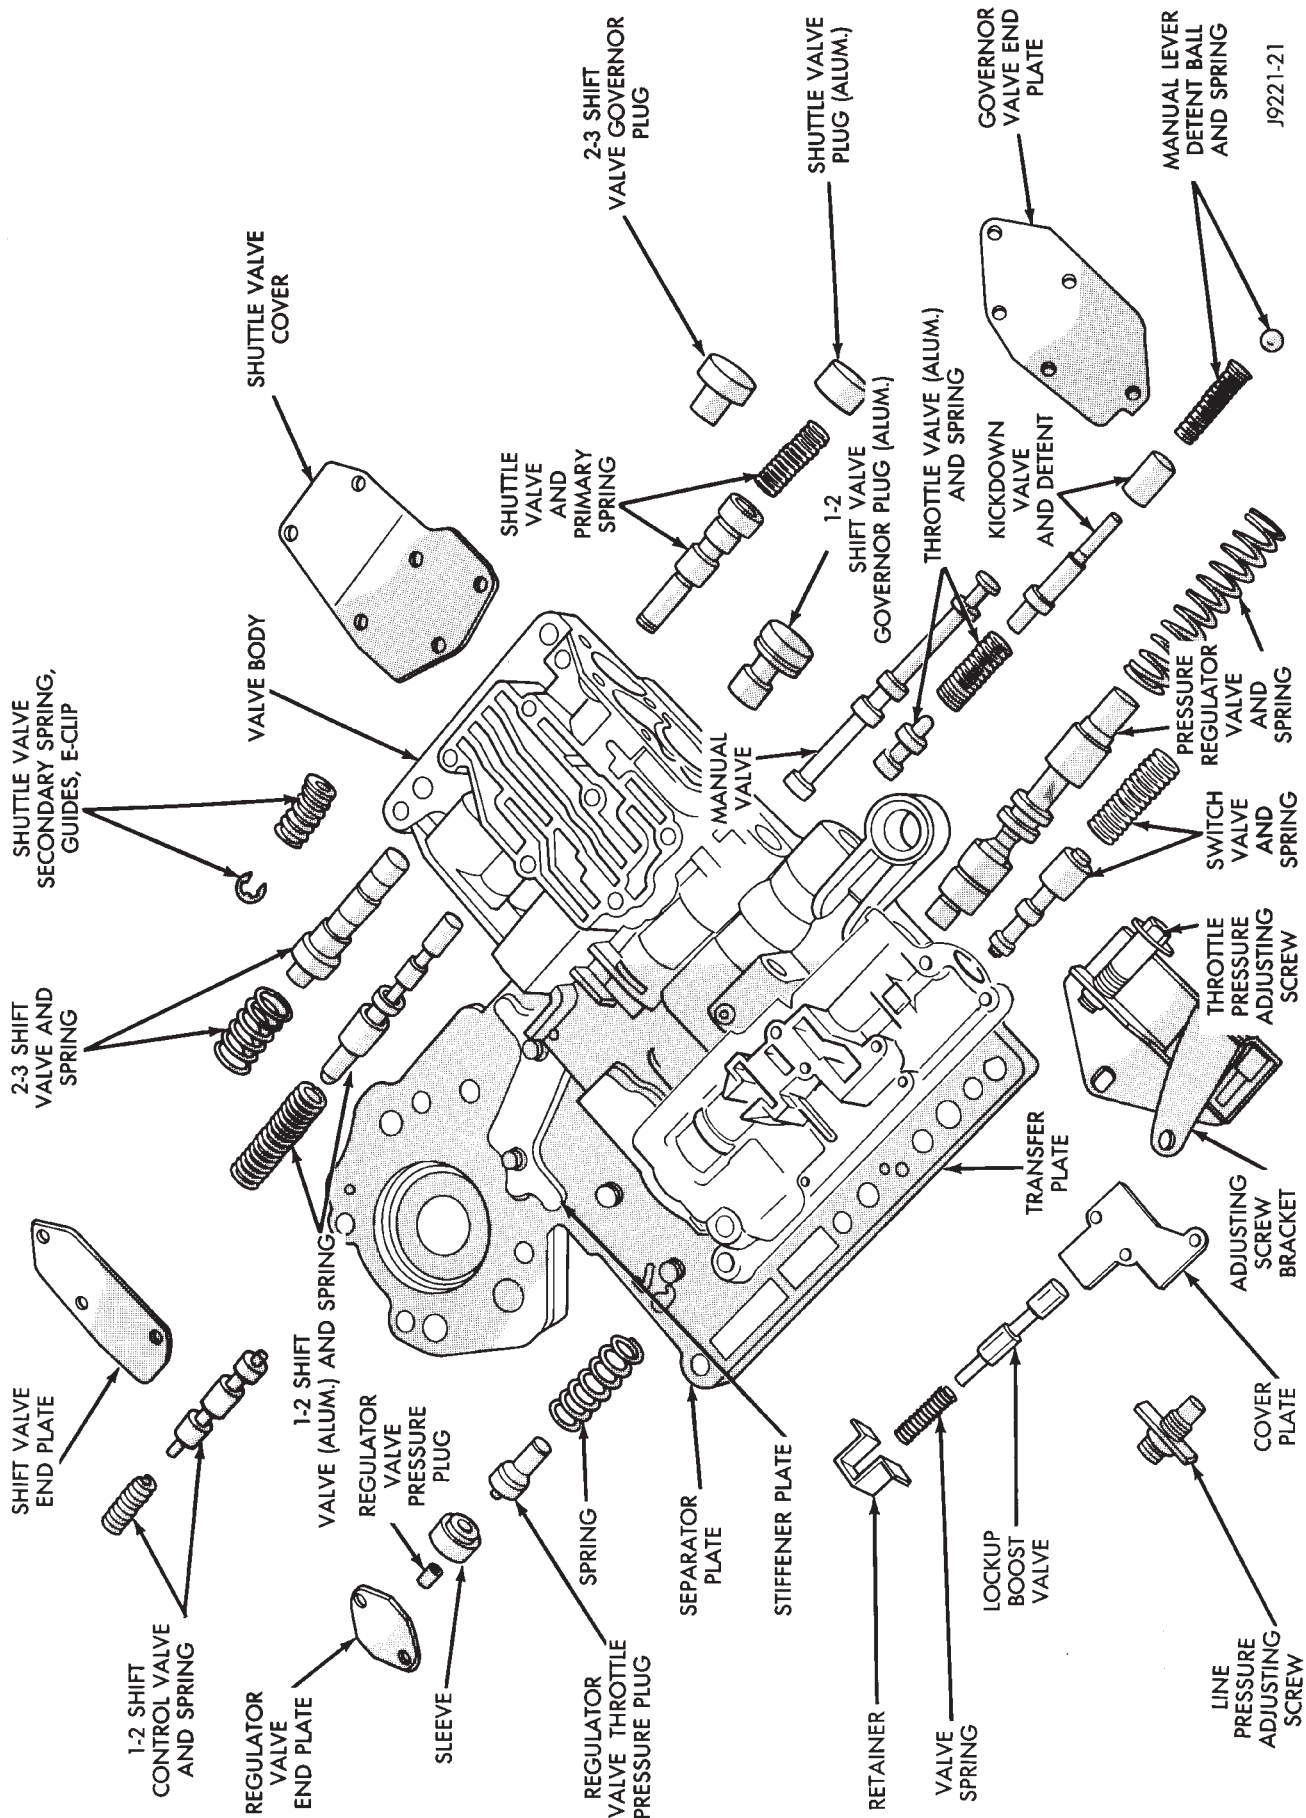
Upper Housing Components (42RH) Valve Body (Alum. Indicates Aluminum Part)
